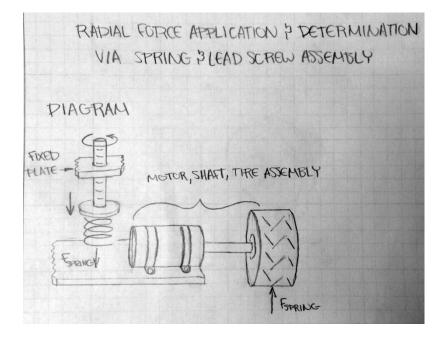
Hand sketch diagram illustrating the spring and lead screw concept for setting and determining radial force. Shaft length exaggerated for clarity.
